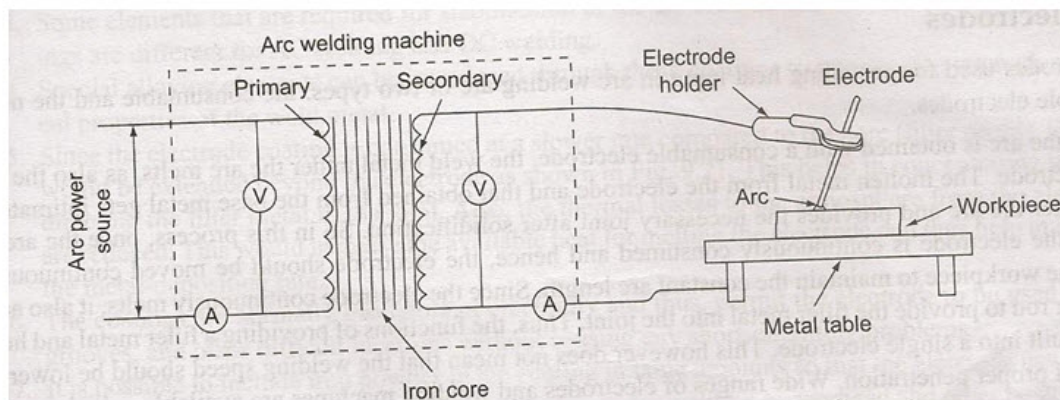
Sectional view of representation of the arc-welding set-up
